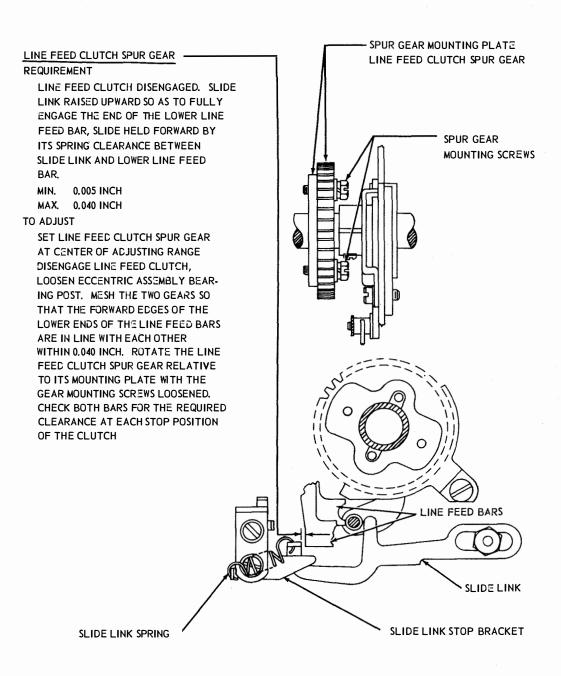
TYPING UNIT, LINE FEED MECHANISM, LEFT SIDE VIEW
